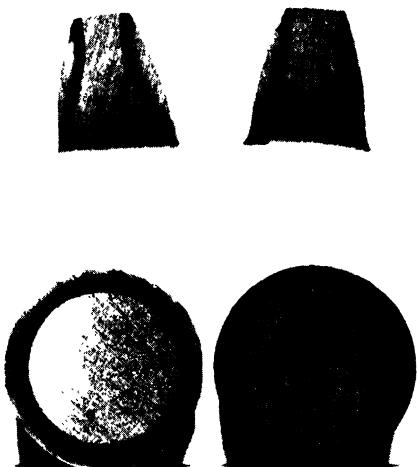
Sections of flame-hardened objects. Top, gear teeth; bottom, 1 3/8-in.-diameter rounds with heavy and light case. (Courtesy A. B. Kinzel)
